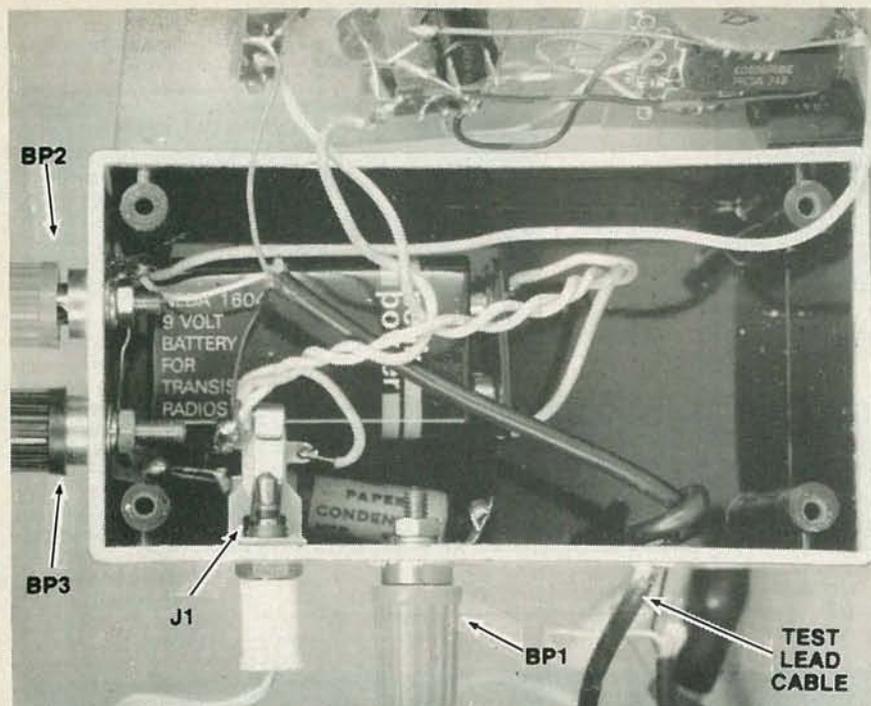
BINDING POSTS and earphone jack are mounted on case. Refer to Fig. 3 for details of connections to PC board.
